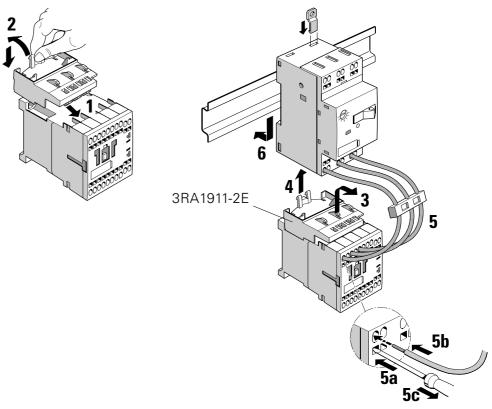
Self-assembly, rail, direct starter (frame size S00, Cage Clamp)
